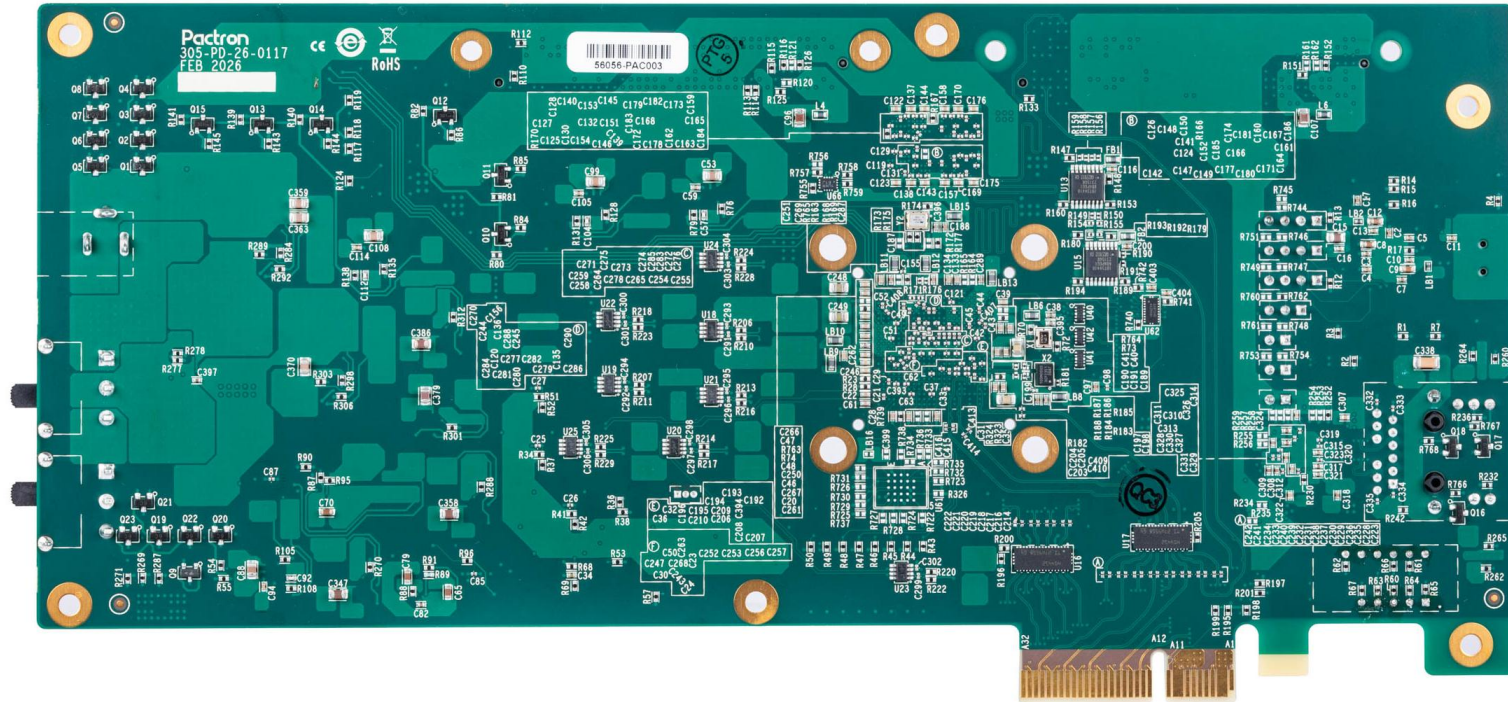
Mach-N2 Evaluation Board – Bottom view
